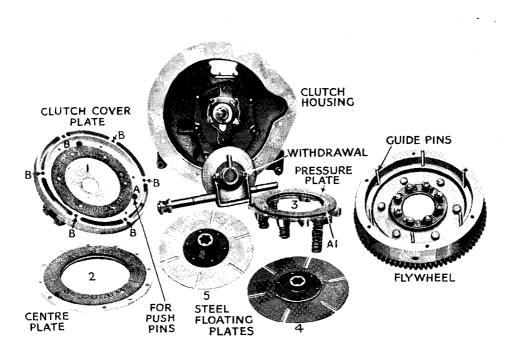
Illustration No. 57.—View inside the clutch housing showing the withdrawal mechanism.
